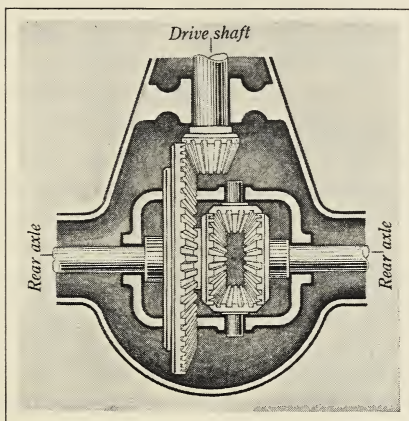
The Differential in the Rear Axle of an Automobile transfers the Power from the Drive Shaft to the Rear Wheels
